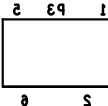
EV-ADF5612SD1Z Evaluation Board Solder Mask, Bottom Side
